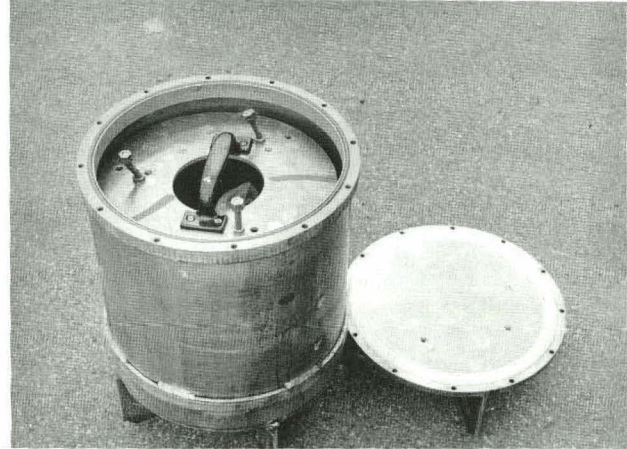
Free drop damage to clamping fixture, configuration-3. Two of the three rods were bent on impact with 30 lb (135 kg) fastened inside.
